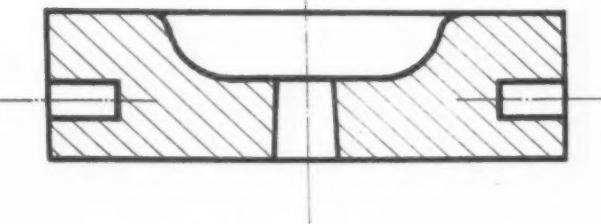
Ingot Mold Stool Used in Bottom Pouring of Large Ingots. Material: Cast Iron or Cast Steel
